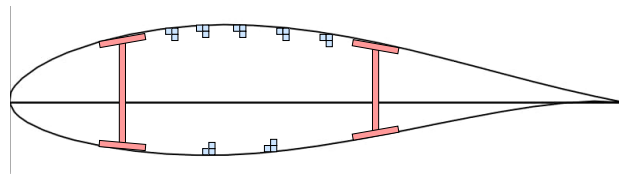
Airfoil Cross-section with Stringers at Spanwise Location 9.4m
